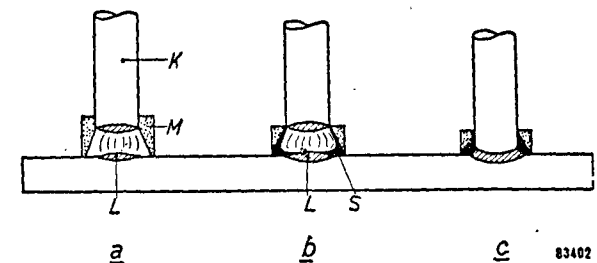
The different stages in stud welding with a partially stripped contact welding electrode having a "cupped" tip. M portion of coating left on the rod. K core wire. L Molten pool of metal. S Slag. (a) Immediately after the striking of the arc (b) just before the electrode drops through the cup. The coating and the core wire have partly melted. A pool of molten metal and a certain amount of slag have been formed (c) After the electrode has dropped to the cup. The weld metal is covered with slag and the remnant of the cup around the weld helps to shape it.
